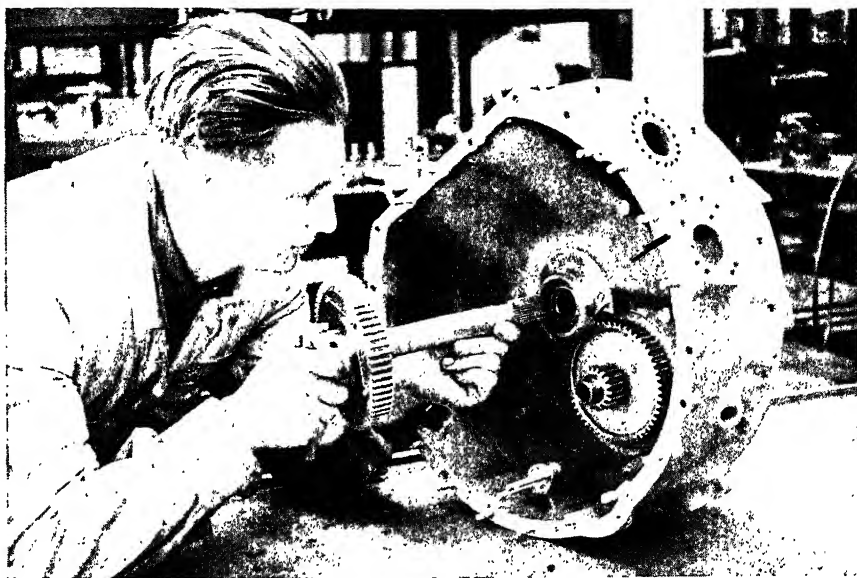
FITTING EXTENSION DRIVE SHAFT
